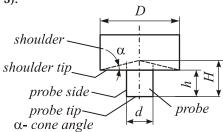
Basic shape of the friction stir welding tool and basic active surfaces 4.
